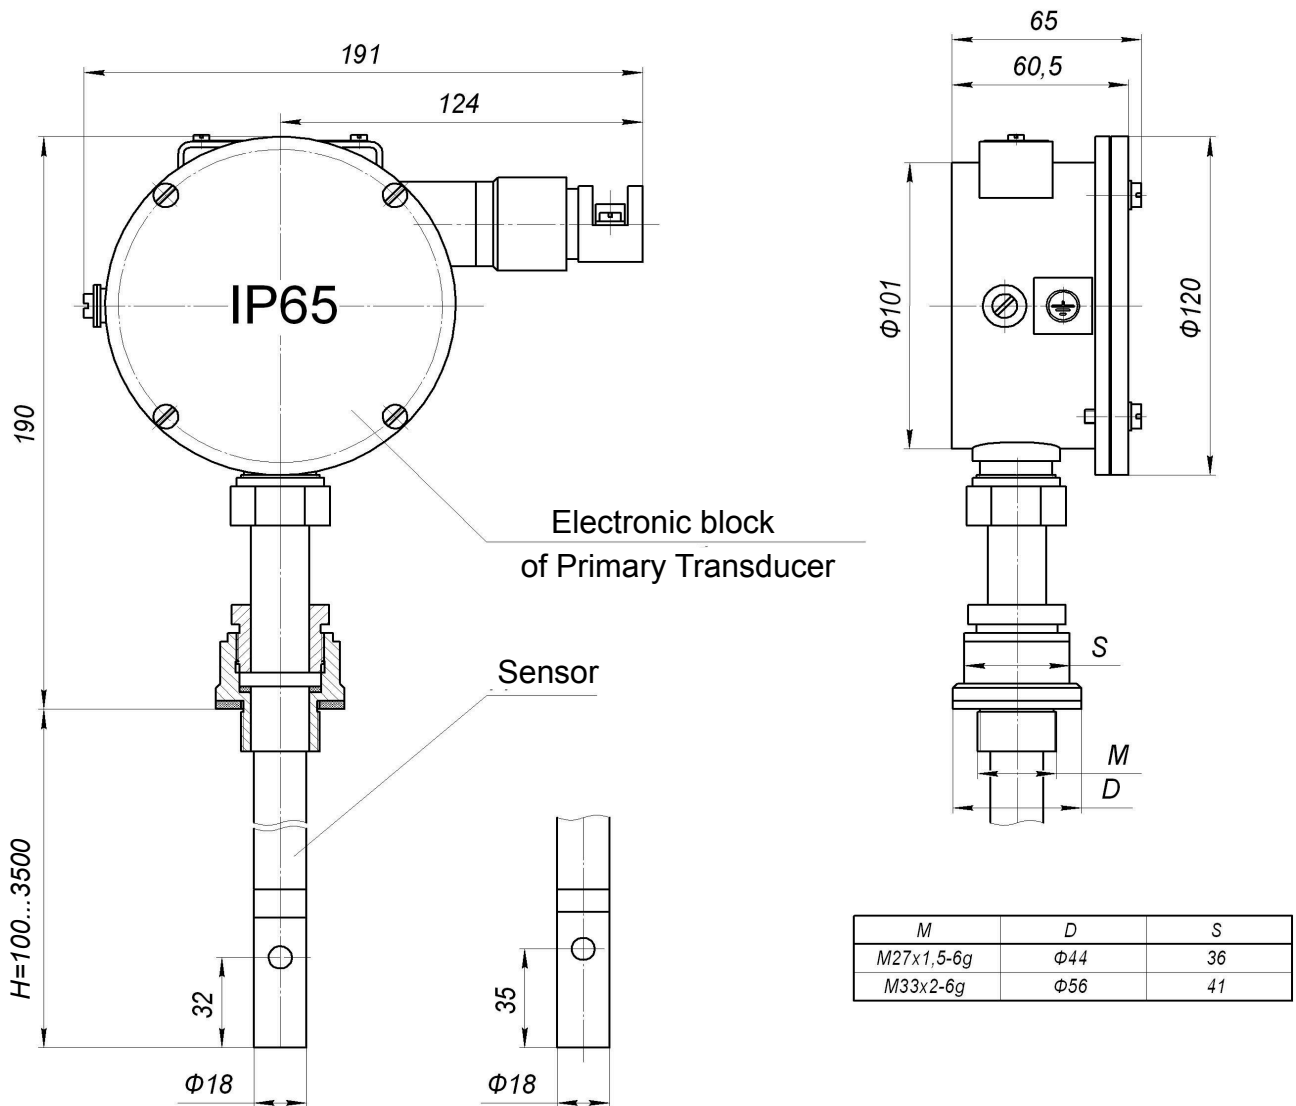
Overall, mounting and connecting dimensions of the monoblock primary transducer of the C-3101M.1 (2; K) .NP submersible type
